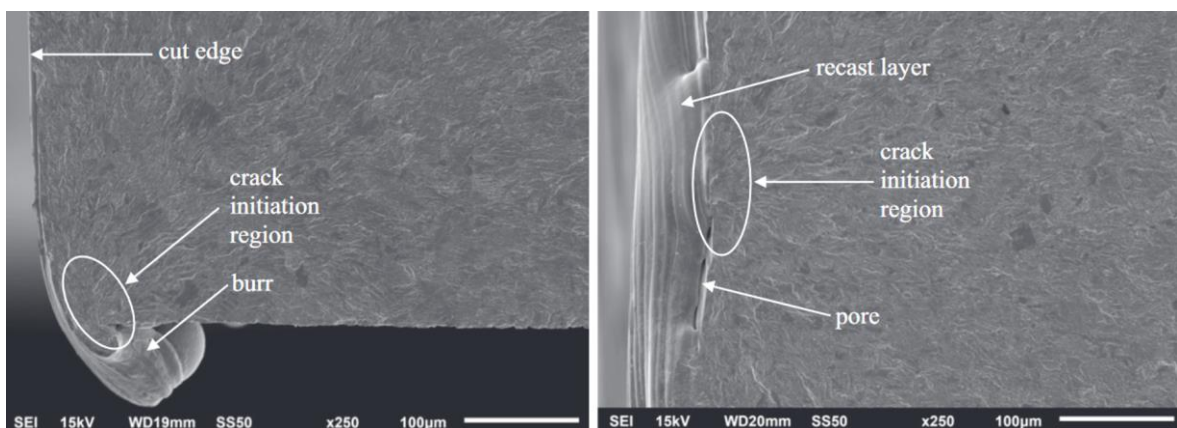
Laser cut edge and crack initiation location from burr and burr removed specimens. (Modified Pessoa et al. 2017)
